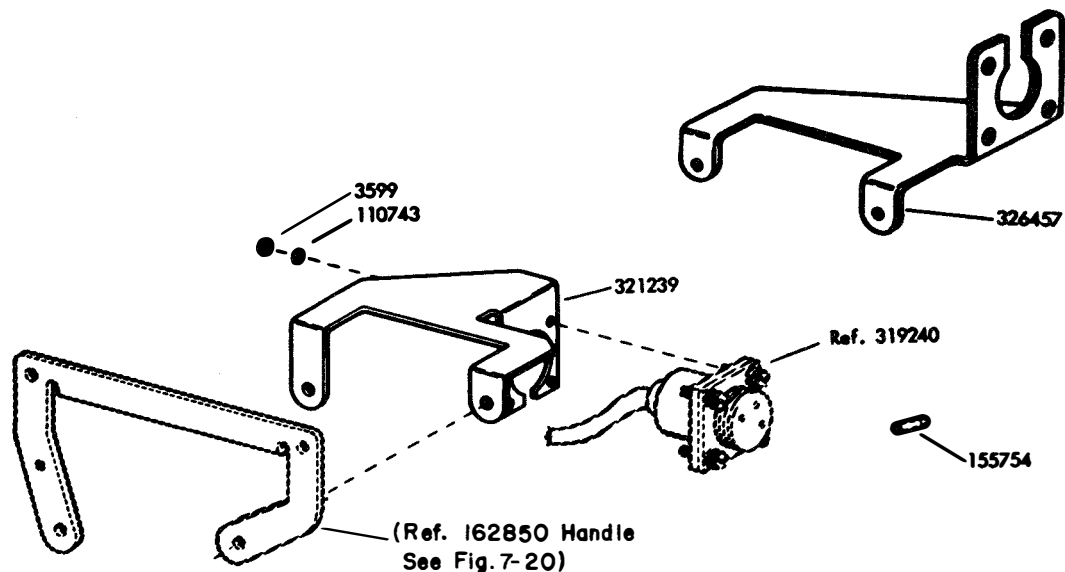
Cable Mounting Components for Typing Reperforator - Used on Low-Level Sets
